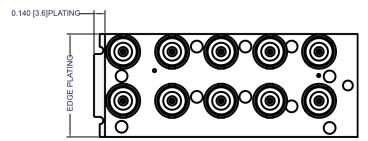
DFR-8321 Rear Module — Edge Plating on the Primary Side and Shoulders
